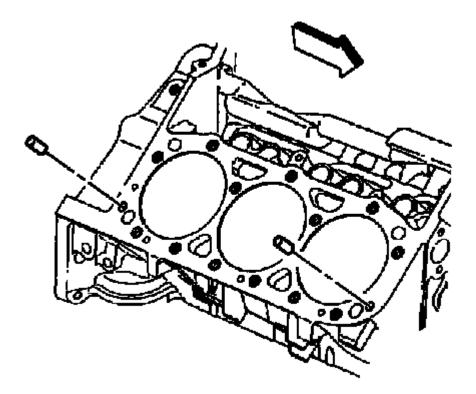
View Of Cylinder Head Locator Pins - Right Courtesy of GENERAL MOTORS CORP.
